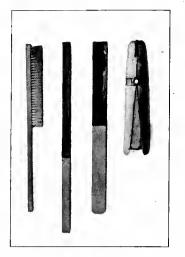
Burnisher Scraper Scratch Awl Center punch
